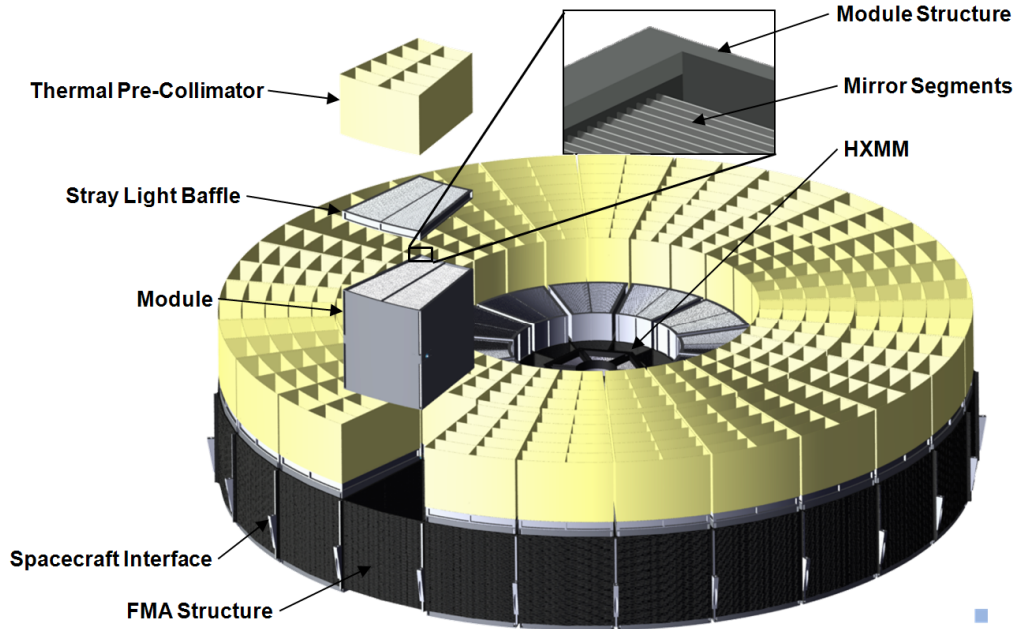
Exploded view of FMA and module illustrating the basic parts of the assembly. Each of the 60 SXT modules contains approximately 200-300 bonded-in mirror segments.
